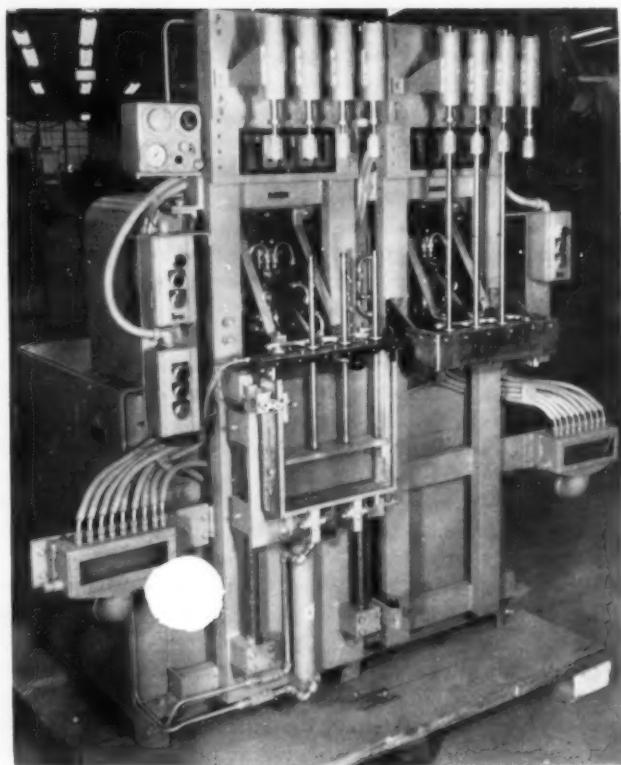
Two-Station Machine for Assembling Push Rods (Four at a Time) for Diesel Engines. In machine at right a nitrided ball is attached to the lower end. In machine at left a hardened collar is attached to the center of the rod
